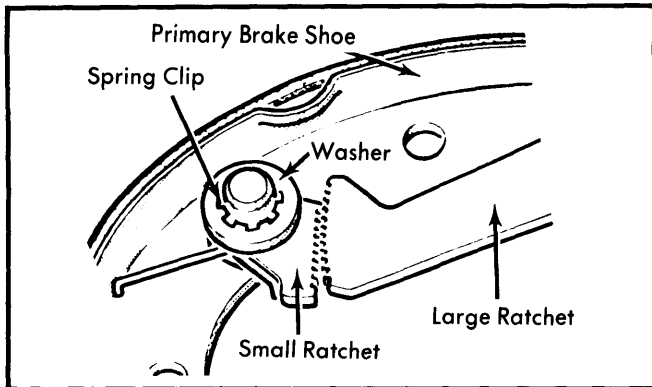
Assembling Ratchets on Primary Brake Shoe
